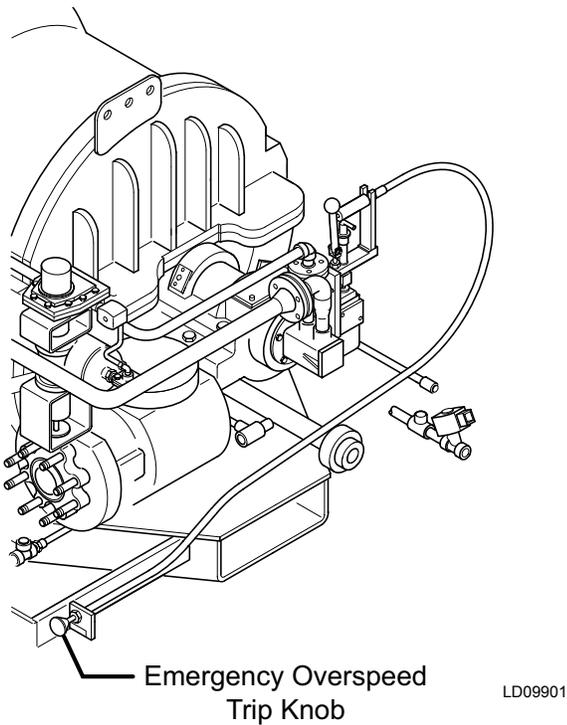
OVERSPEED PROTECTION KNOB ASSEMBLY
